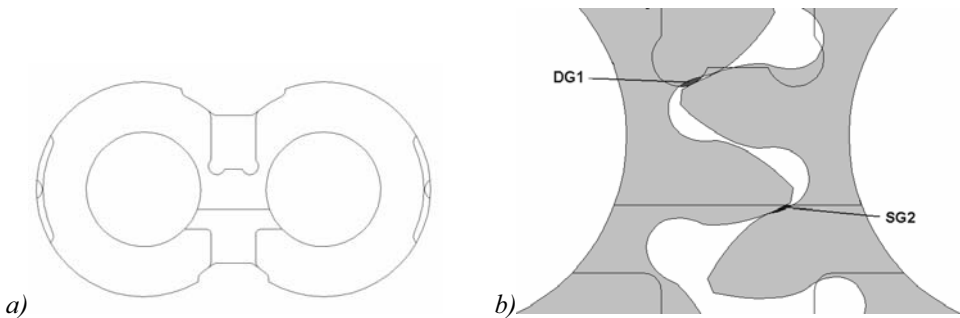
a) Standard design of grooves manufactured on the bearing blocks
